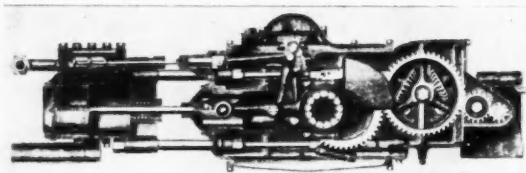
A section through the Doble engine and rear axle showing how the 4-cylinder power unit drove the differential gear through a spur gear on the engine crankshaft. This coupling of the engine and rear axle was common practice on steam cars.
